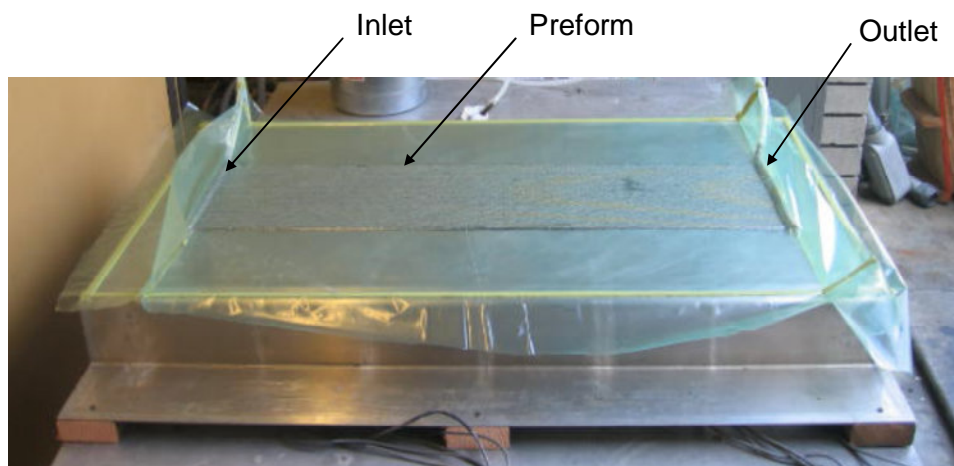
Photograph showing the dry fiber preform on the mold surface covered with a vacuum bag. Pressure sensor ports cannot be seen due to presence of preform.
